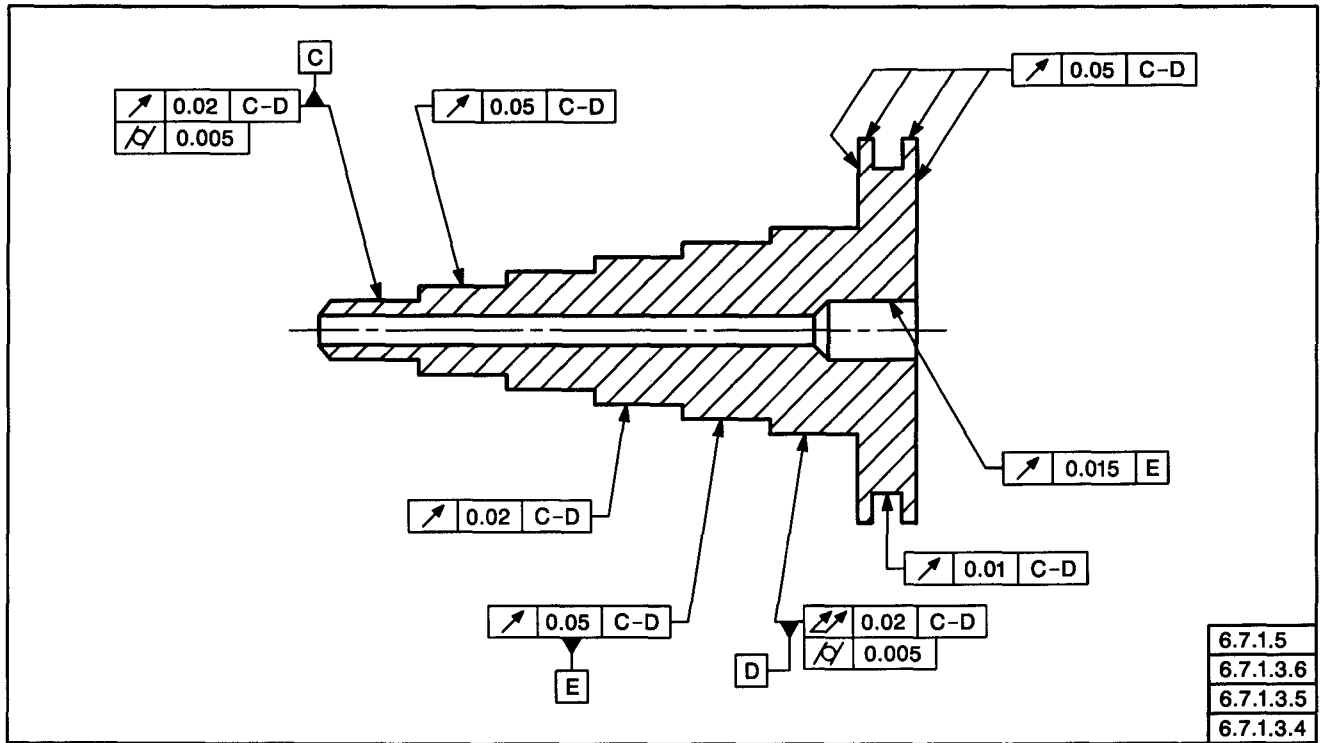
SPECIFYING RUNOUT RELATIVE TO TWO DATUM DIAMETERS WITH FORM CONTROL SPECIFIED
